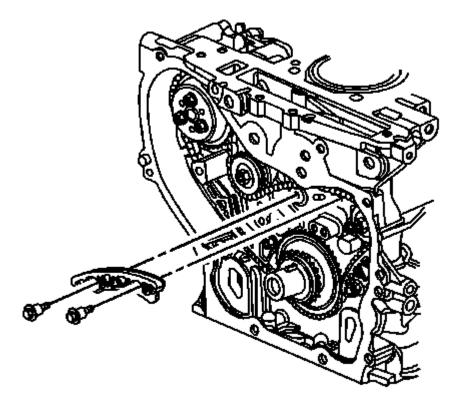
Balance Shaft Drive Chain Courtesy of GENERAL MOTORS CORP.
